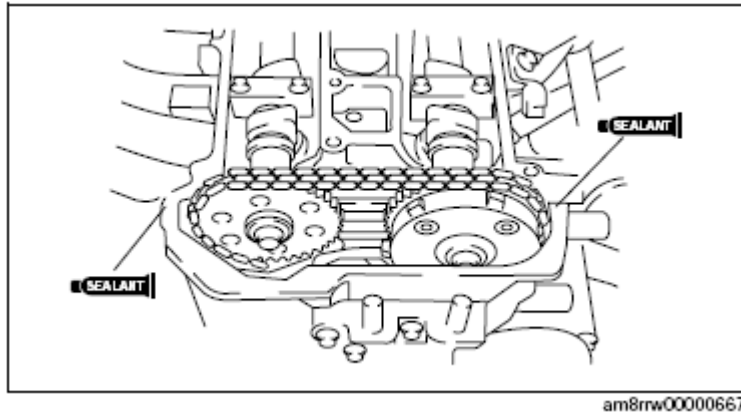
Applying Silicone Sealant To Mating Faces Of Cylinder Head Cover
